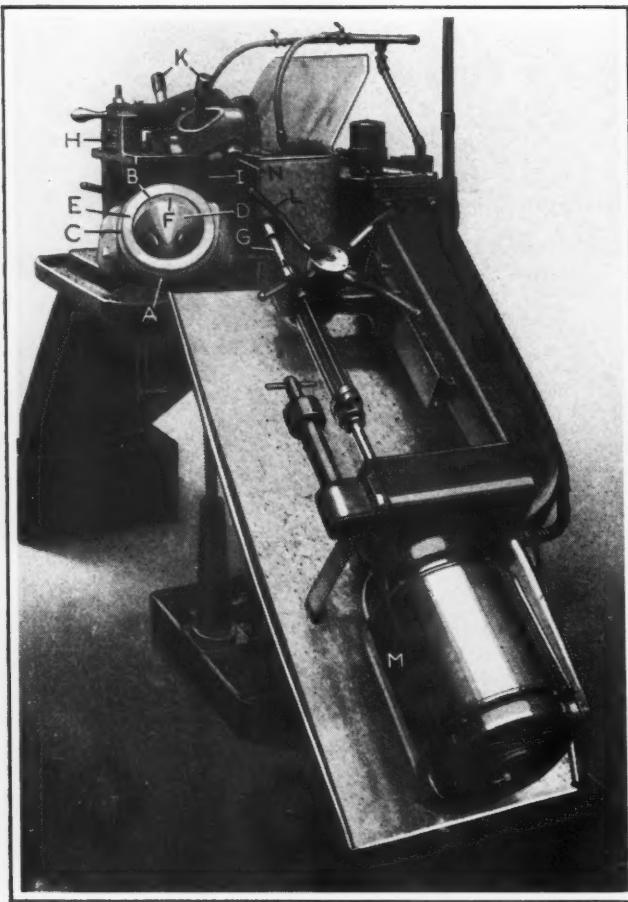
Machine Designed with Two Motor-driven Spindles for Drilling, Reaming, and Spot-facing the Rocker-arm Holes
